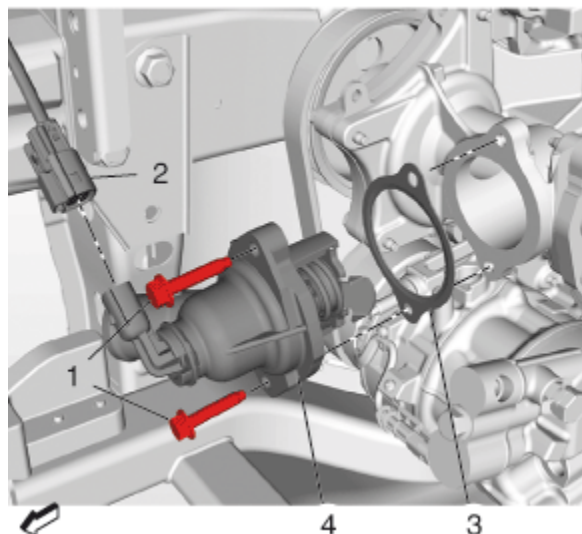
Electrical Connector And Engine Coolant Thermostat Housing Bolt
